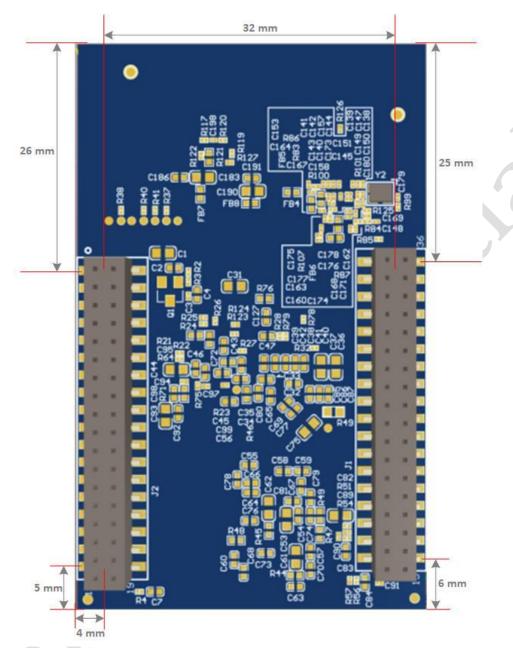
LS11 Bottom View - Mechanical Dimension 2
